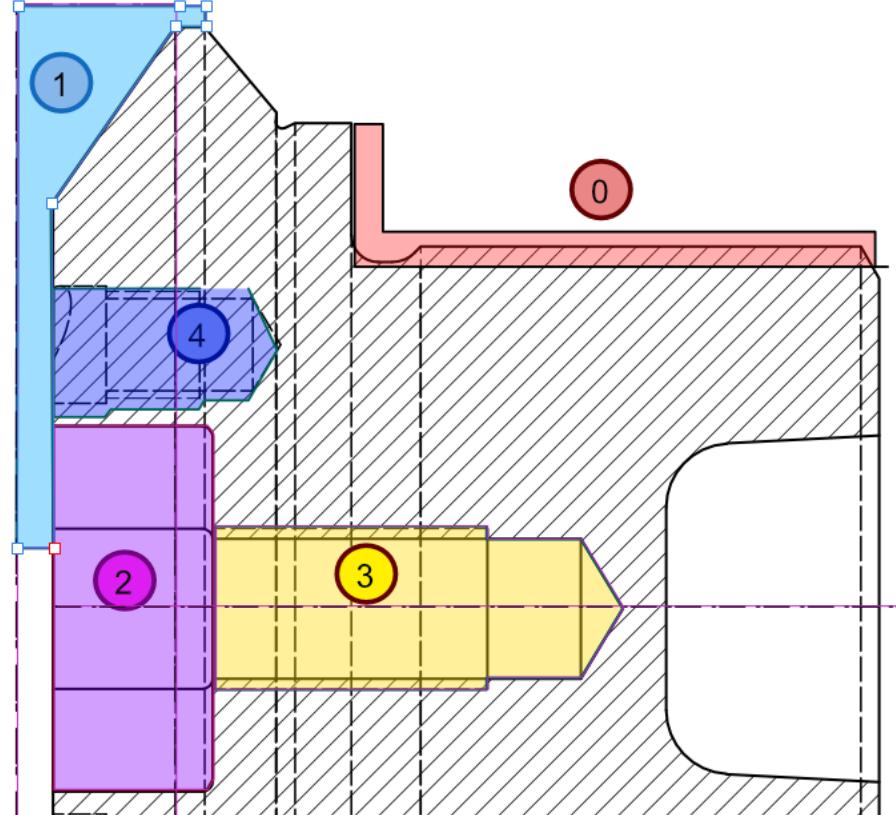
Operation 2 of locking bolt machining: 1) roughing 2) pocket machining 3) threaded central hole machining 4) small off-centre threaded holes machining.
